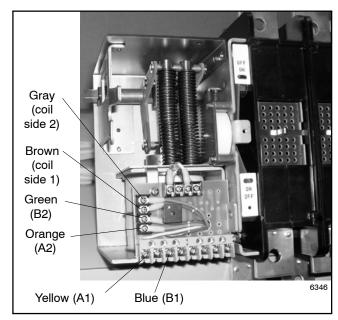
400 Amp Contactor Assembly, Cover Removed
